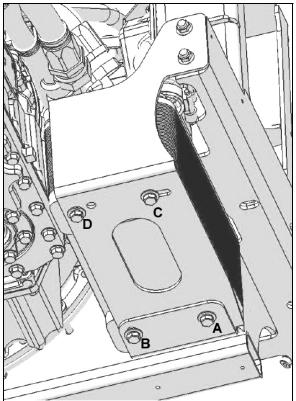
COOLER POSITION DURING ENGINE CRADLE INSERTION OR REMOVAL
